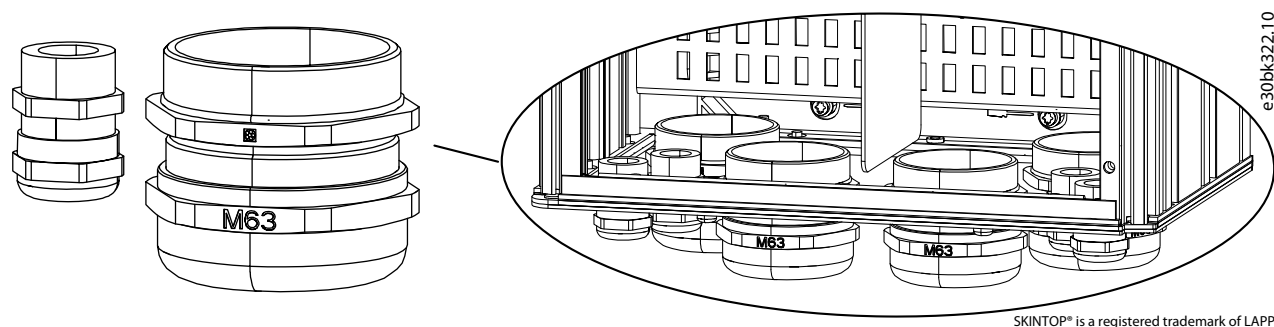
Cable Entry Plate with SKINTOP® Cable Glands
